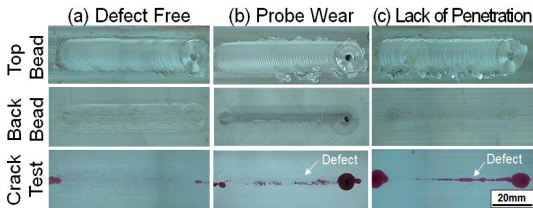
Appearance of top, back bead and liquid penetrant test after FSW process: (a) Defect free, (b) Probe wear defect and (c) Lack of penetration defect
